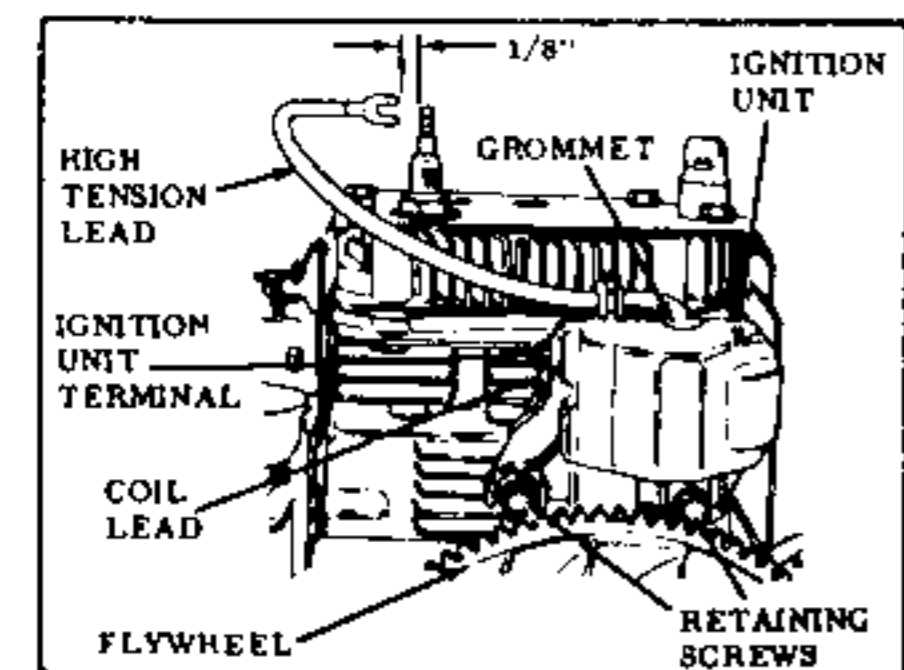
View of solid state ignition unit used on some models equipped with flywheel alternator. System should produce a good blue spark 1/8-inch (3 mm) long at cranking speed.
